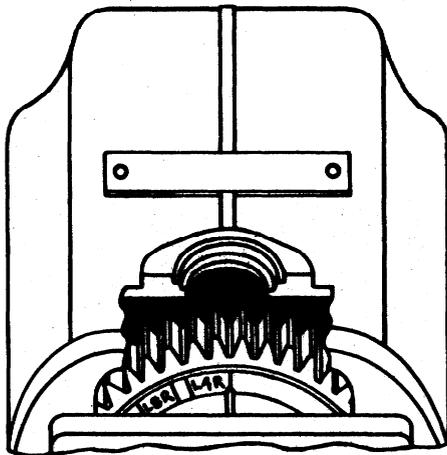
Alignment of Timing Marks on Distributor Gear – 4 Cylinder, Right Hand Rotation
